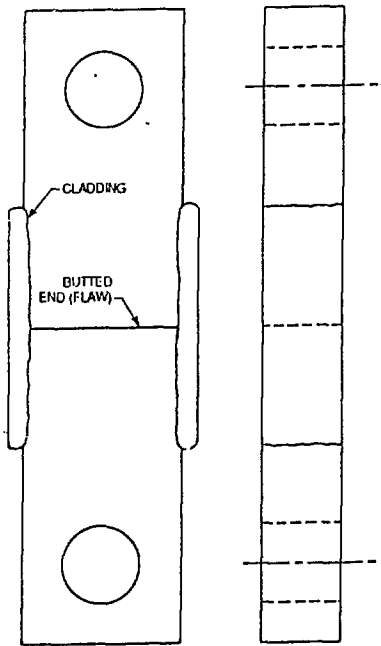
Jo-Block specimen developed to measure fracture properties of cladding over a subclad flaw.
